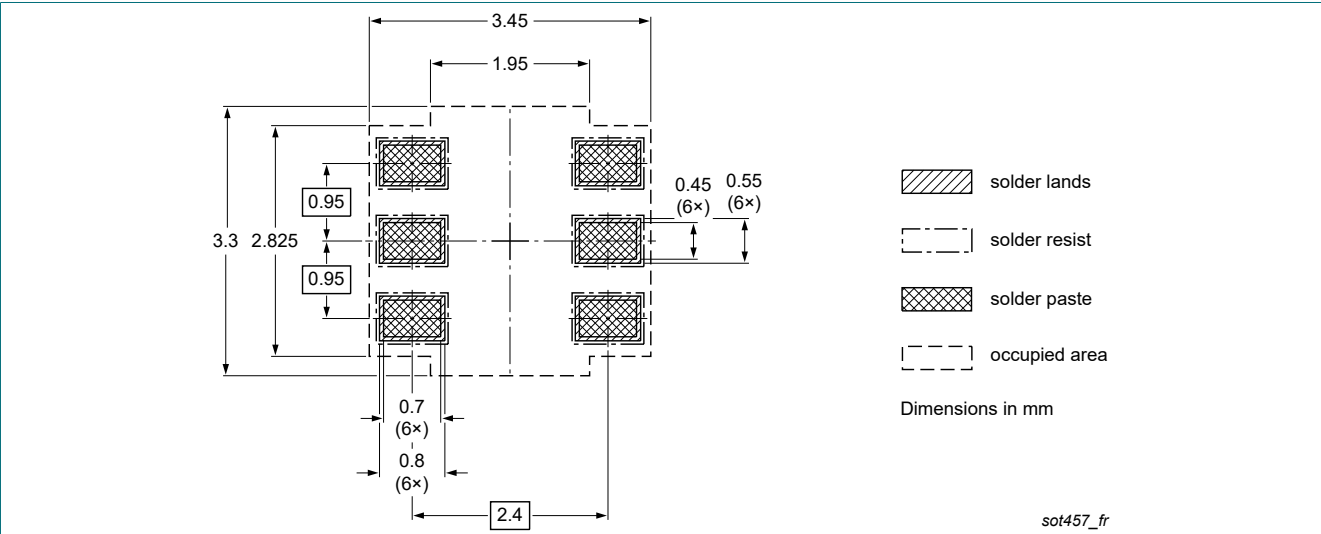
Reflow soldering footprint for TSOP6 (SOT457)
